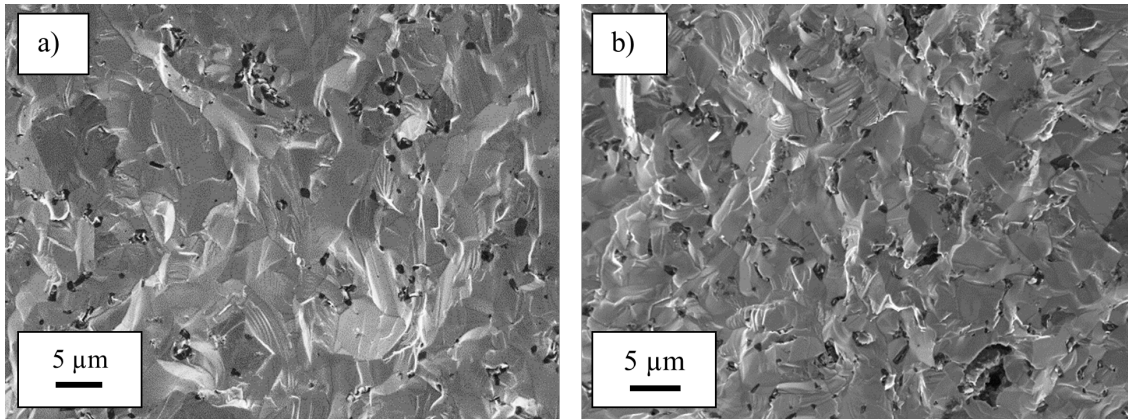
Fracture surfaces of a) a flash sintered sample and b) a sample made using the conventional fire 2 sintering profile.
